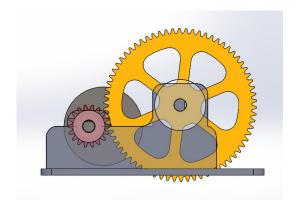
Gearbox design of Mark 3 showing new motor orientation (Side view).
